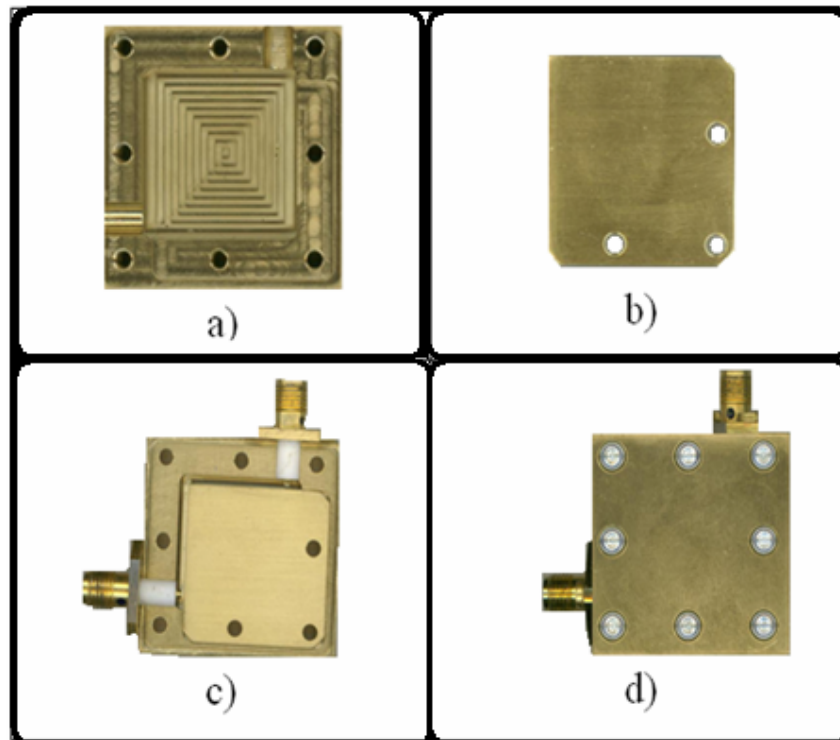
A fabricated single square FWG resonator before assembly (a, b and c) and after assembly (d).
